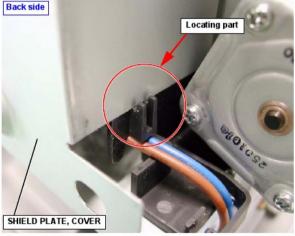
Reassembly the SHIELD PLATE, COVER
